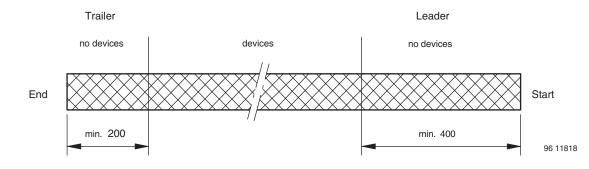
V5-4 Issue: 1; 25.07.02
